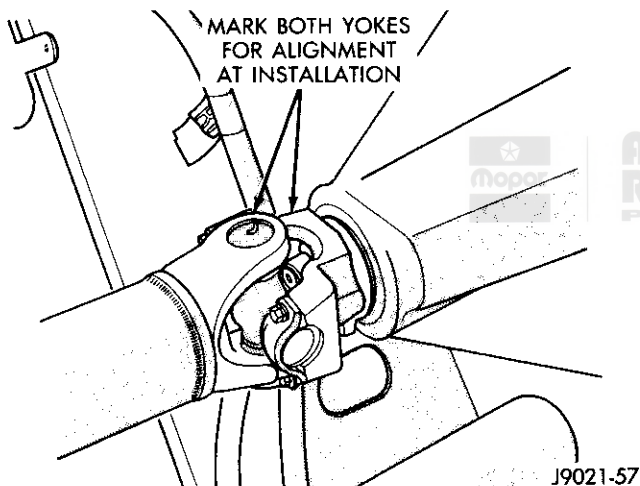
Mark Propeller Shaft And Axle Yoke For Assembly Reference
